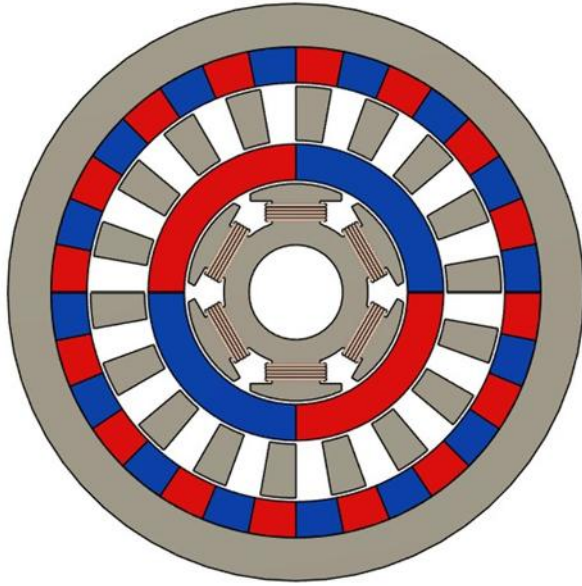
2D cross-sectional view of a Coaxial Magnetic Gear (CMG) with inner motor system.
